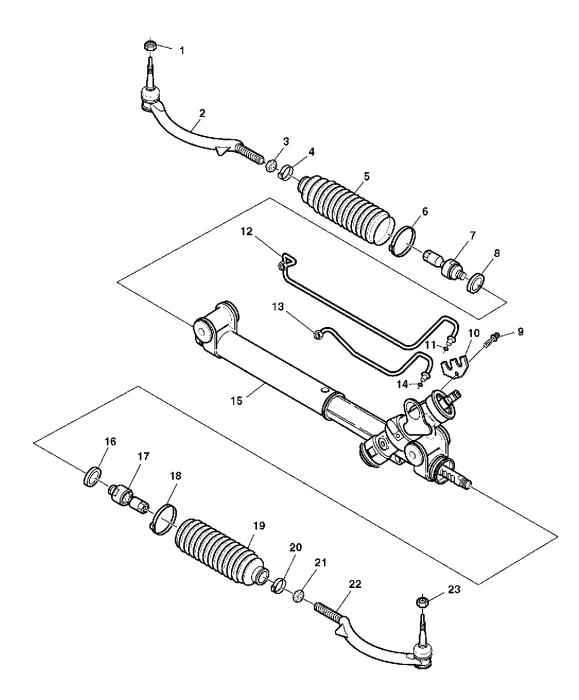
Identifying Power Steering Gear Components Courtesy of GENERAL MOTORS CORP.
